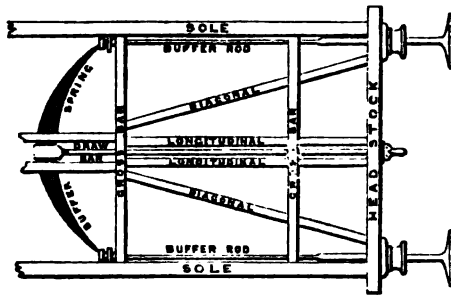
Half plan of underframe showing transverse buffer and draw bar spring.
